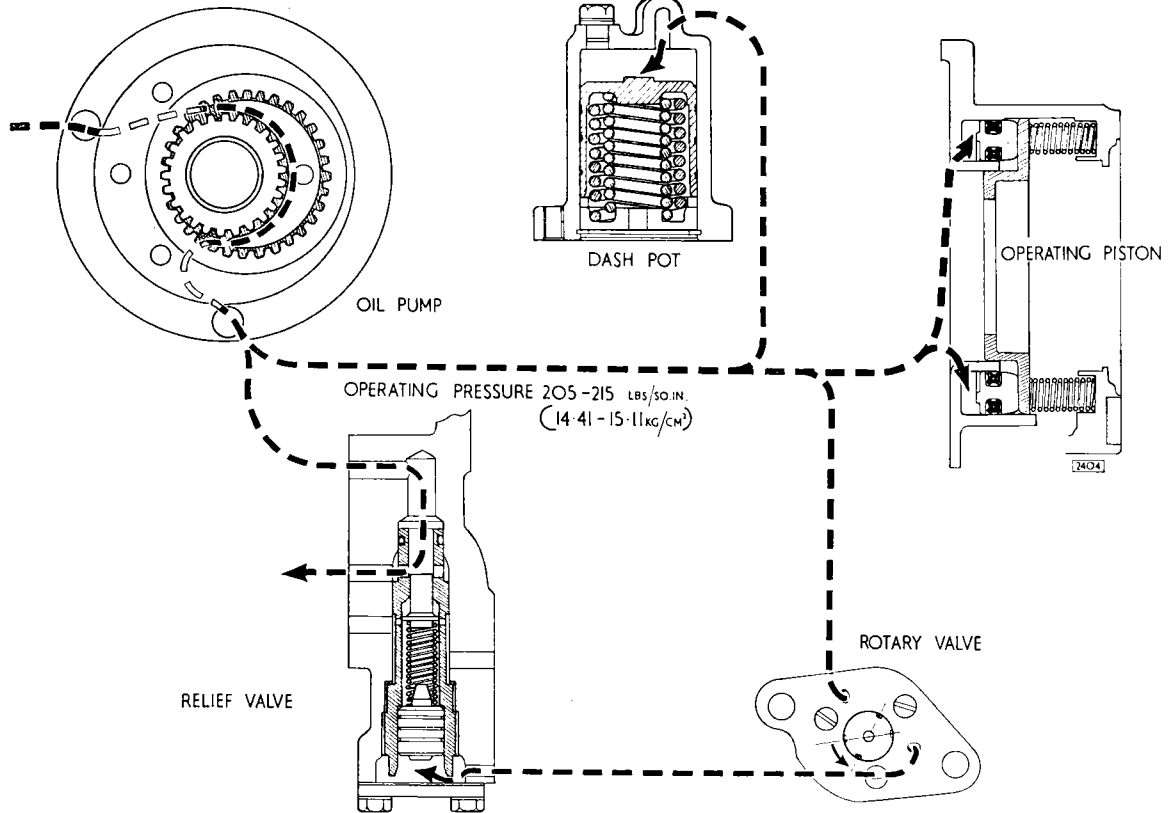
Operating pressure in the hydraulic system. Overdrive in operation.
